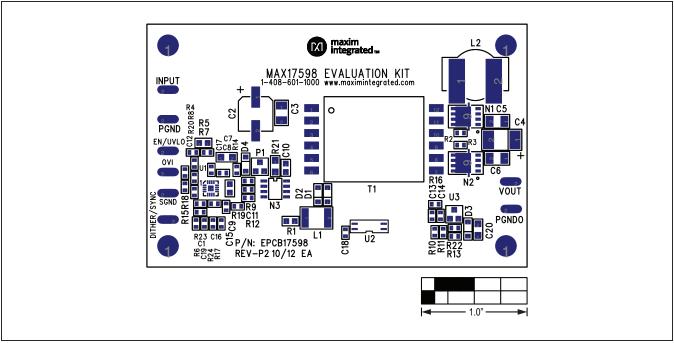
MAX17598 EV Kit Component Placement Guide—Component Side
